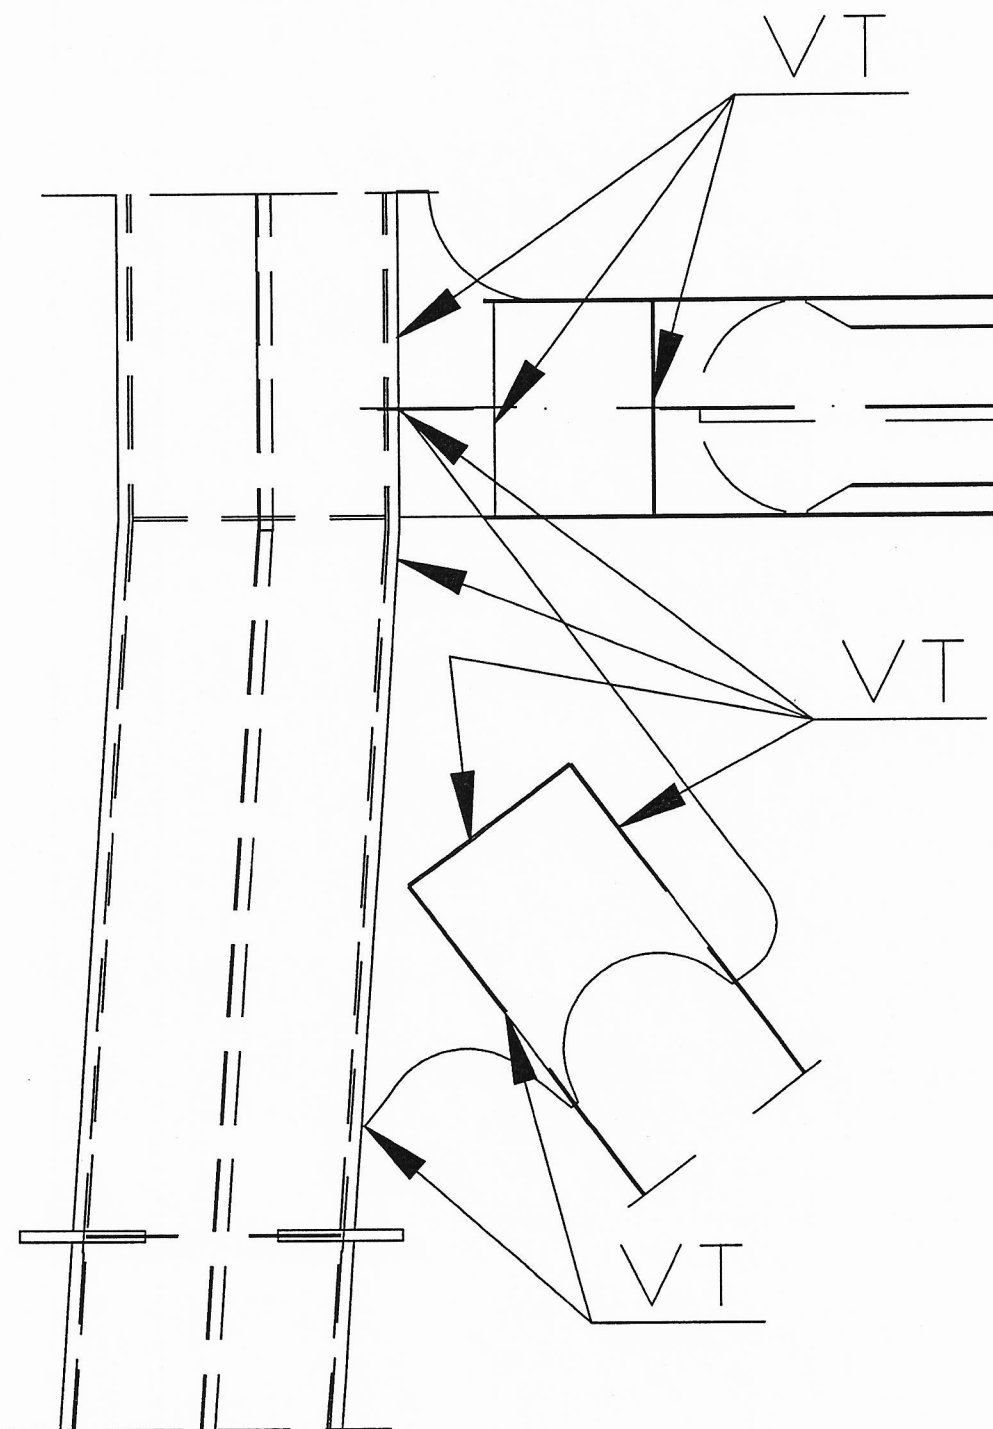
Joints of Seaside Leg and Horizontal Beam
